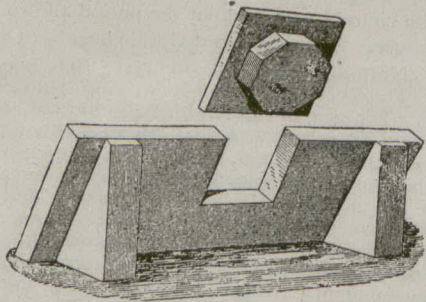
ATTACHMENT TO BAND SAWS, FOR SAWING ORNAMENTS.
